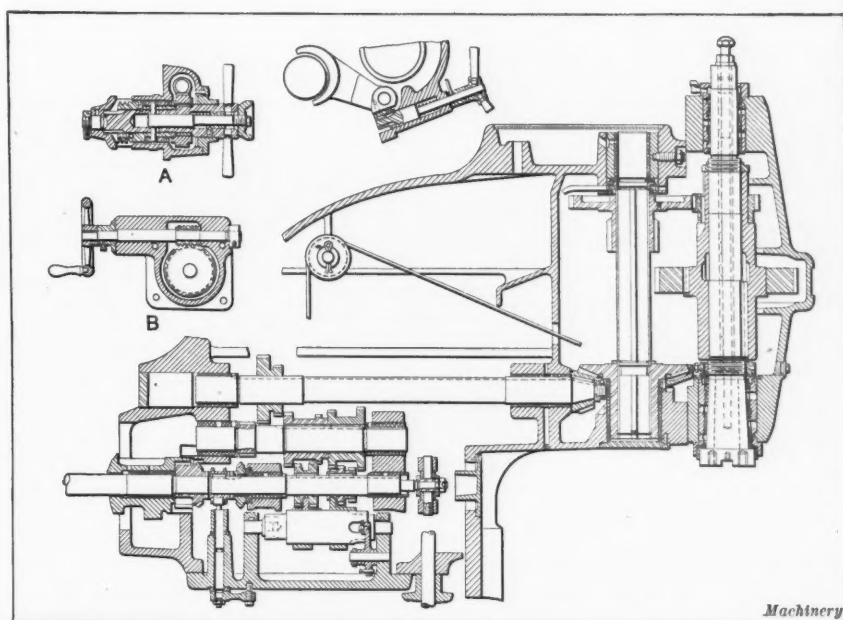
Sectional View showing Arrangement of Speed-changing Mechanism
